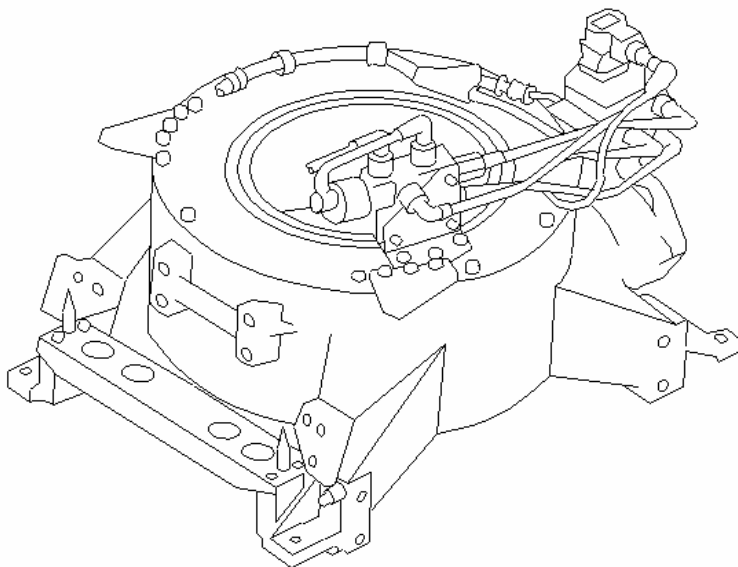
Azimuth Drive Assembly (AH-64A/D)
